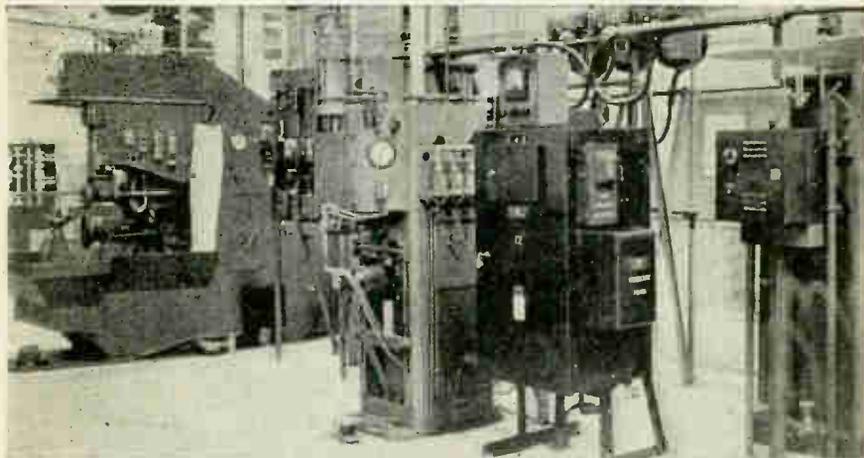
Resistance welding machines which are automatically operated by electronic controls mounted in the cabinets near the machines.
